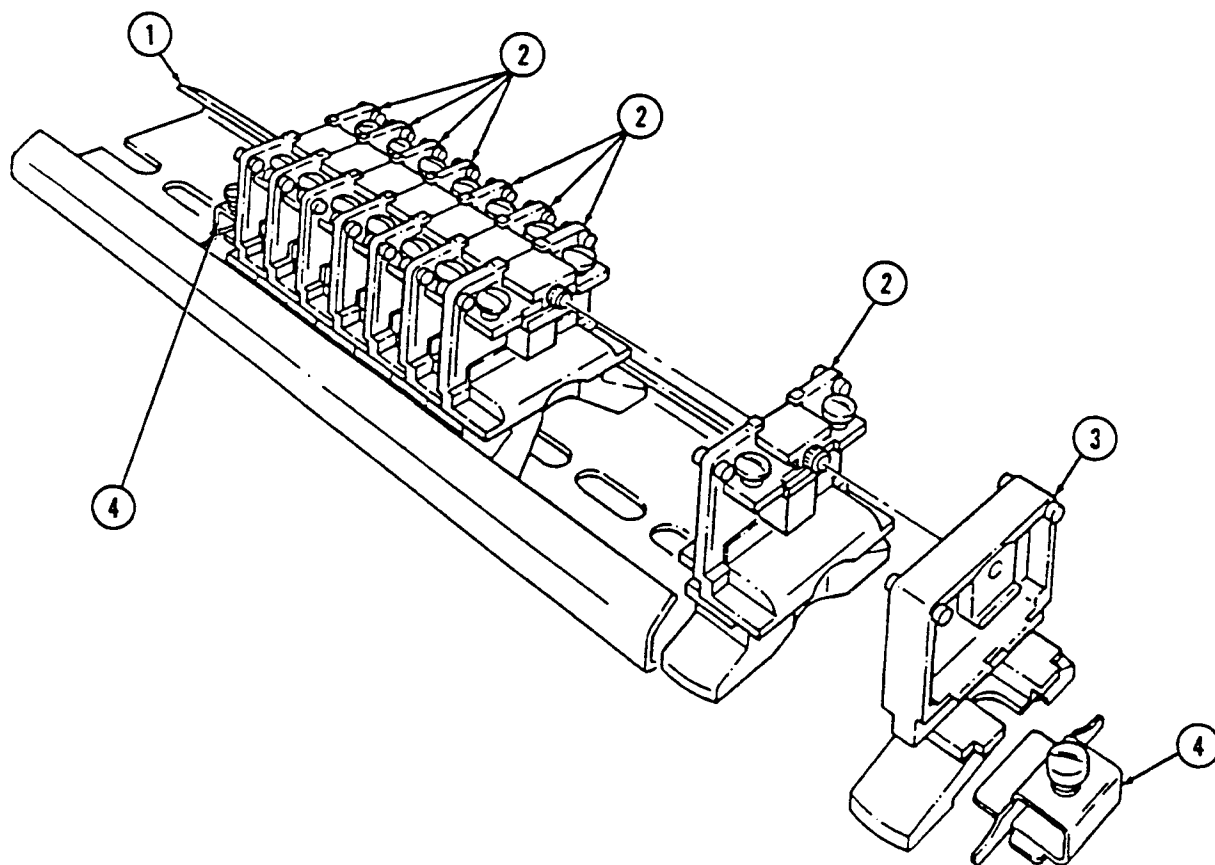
Channel, 6.00-in. (152.4 mm) and Terminal Block Assembly.
